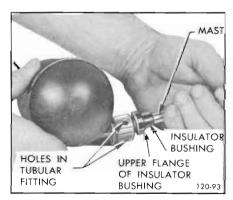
Removing or Installing Mast and Insulator Bushing
